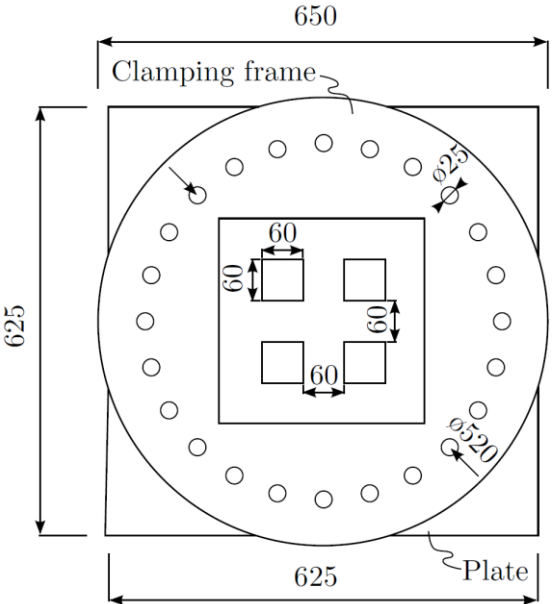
Geometry of the clamping assembly and position of the pre-formed holes. All measures in mm.
